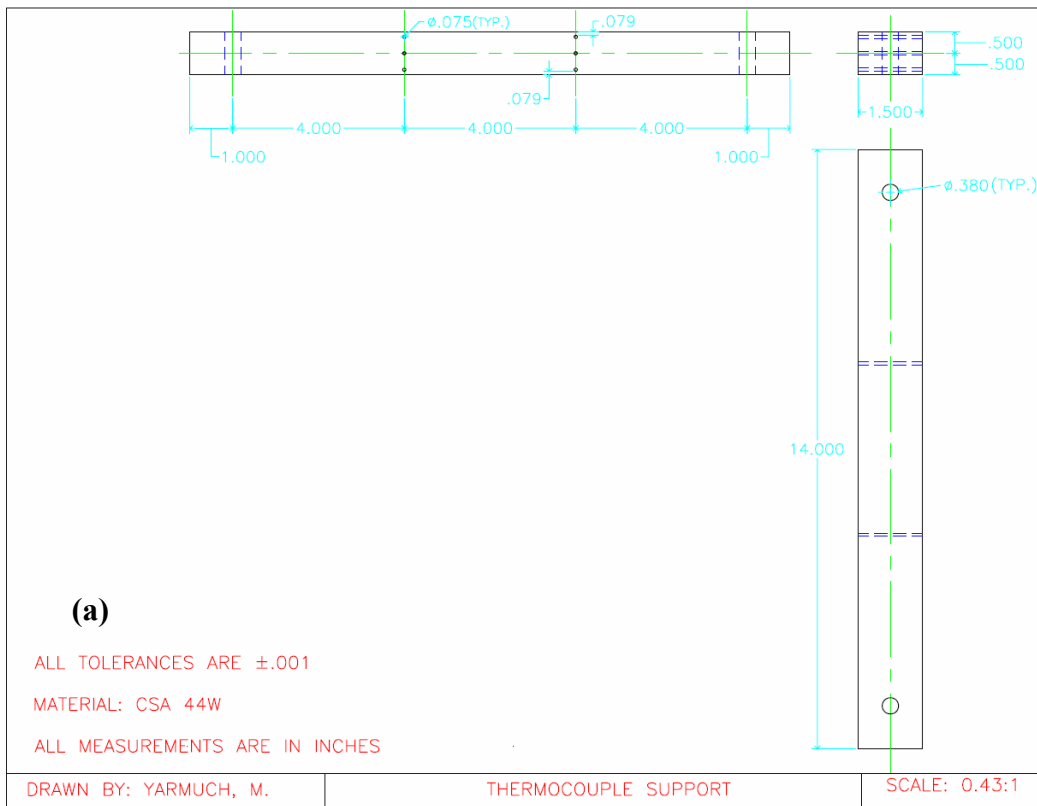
Schematic of placement of thermocouples during welding
